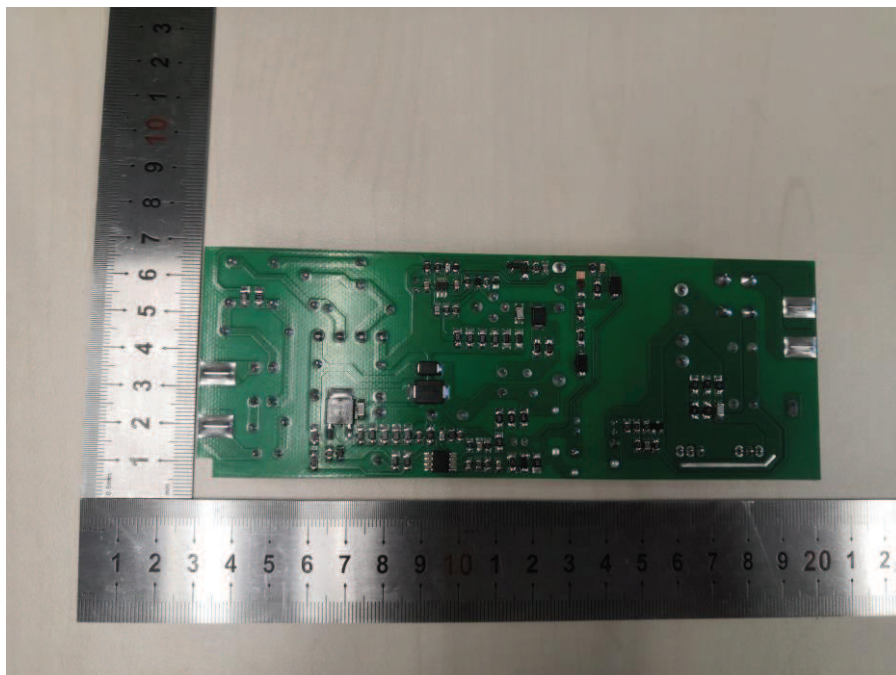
Bottom view of driver PCB of model Q8H-24V-75W-NTC
